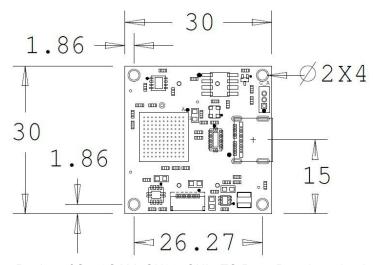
Rear Portion of See3CAM_CU30_CHL_TC Base Board mechanical dimensions
